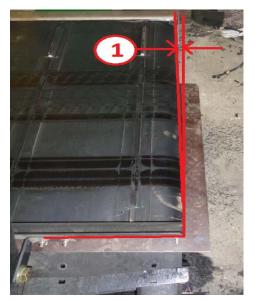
Drive Roller Angle Verification Key 1 – Angle of Drive Roller
